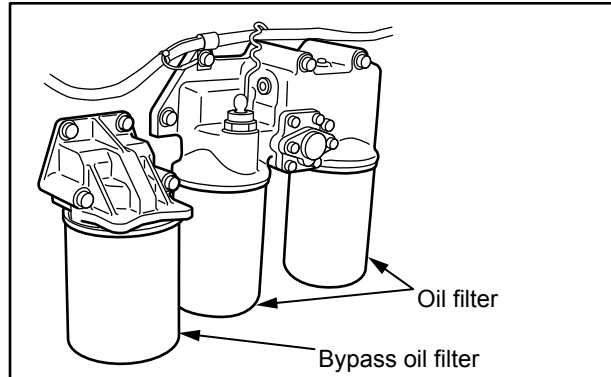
Oil Filter and Bypass Oil Filter - Replace
